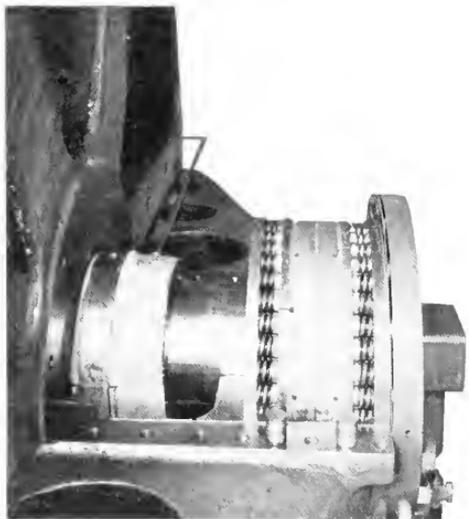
Spring Thrust Bearing for Propeller Shaft of *S.S. Cuba
